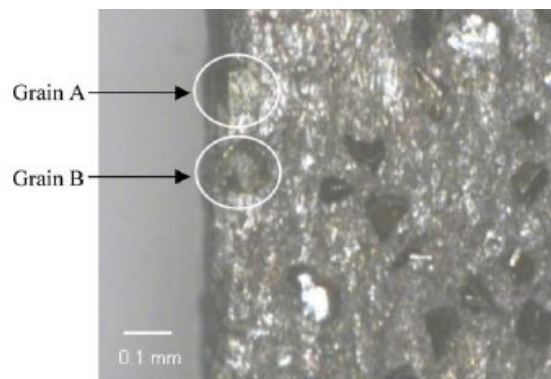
Tool lateral face before drilling test on SiC. Grains A and B were dislodged after 16 drilling tests [8]
